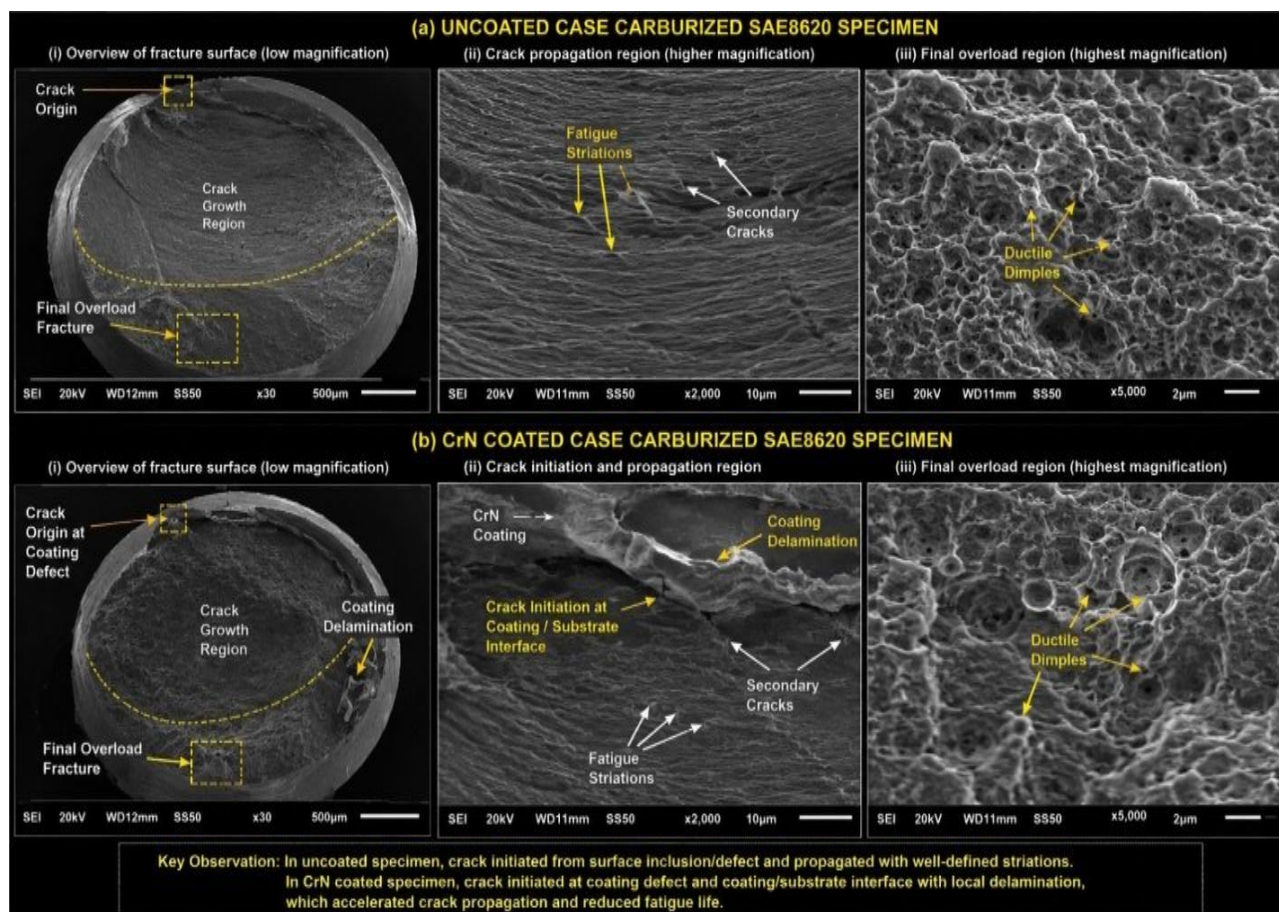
SEM fractographs of uncoated and CrN-coated case-carburized SAE8620 specimens.
